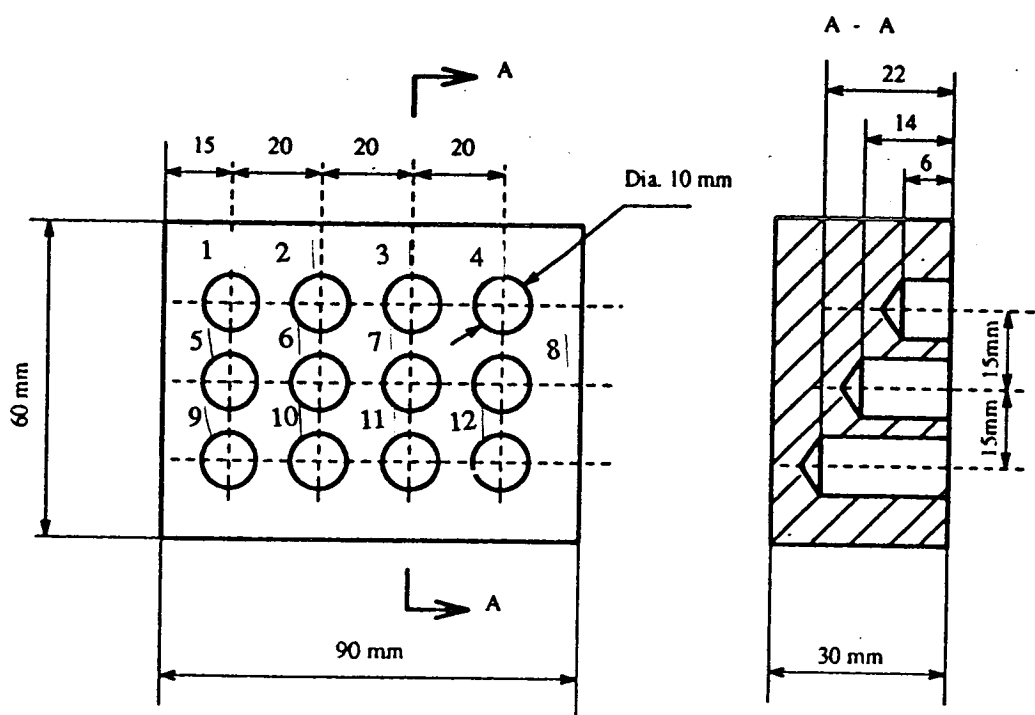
Dimensions of Aluminium Mandrel for Hole Throwing Power
